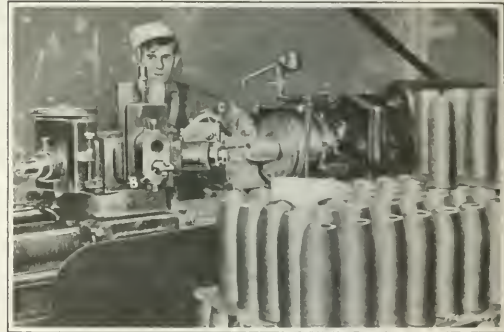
Performing Sixth Operation on a 2-A Warner & Swasey Turret Lathe
